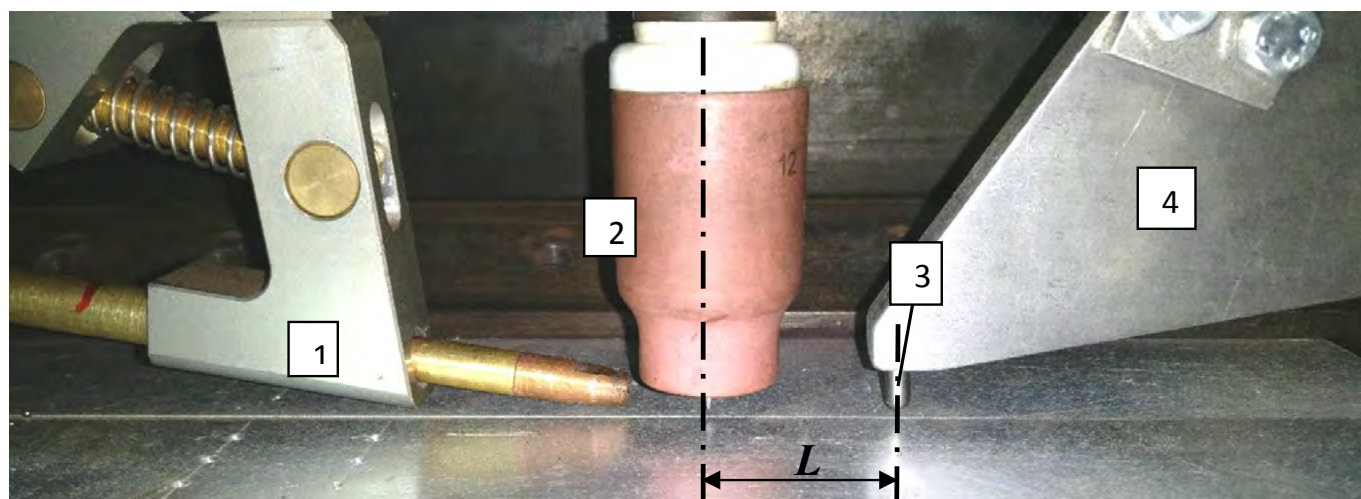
Electrodynamic treatment (EDT) equipment used during welding: 1 – Bowden cable for filler metal wire feeding, 2 – TIG welding torch, 3 – electrode for EDT, 4 – dynamic load device 3,  $L$  – distance between 2 and 3
